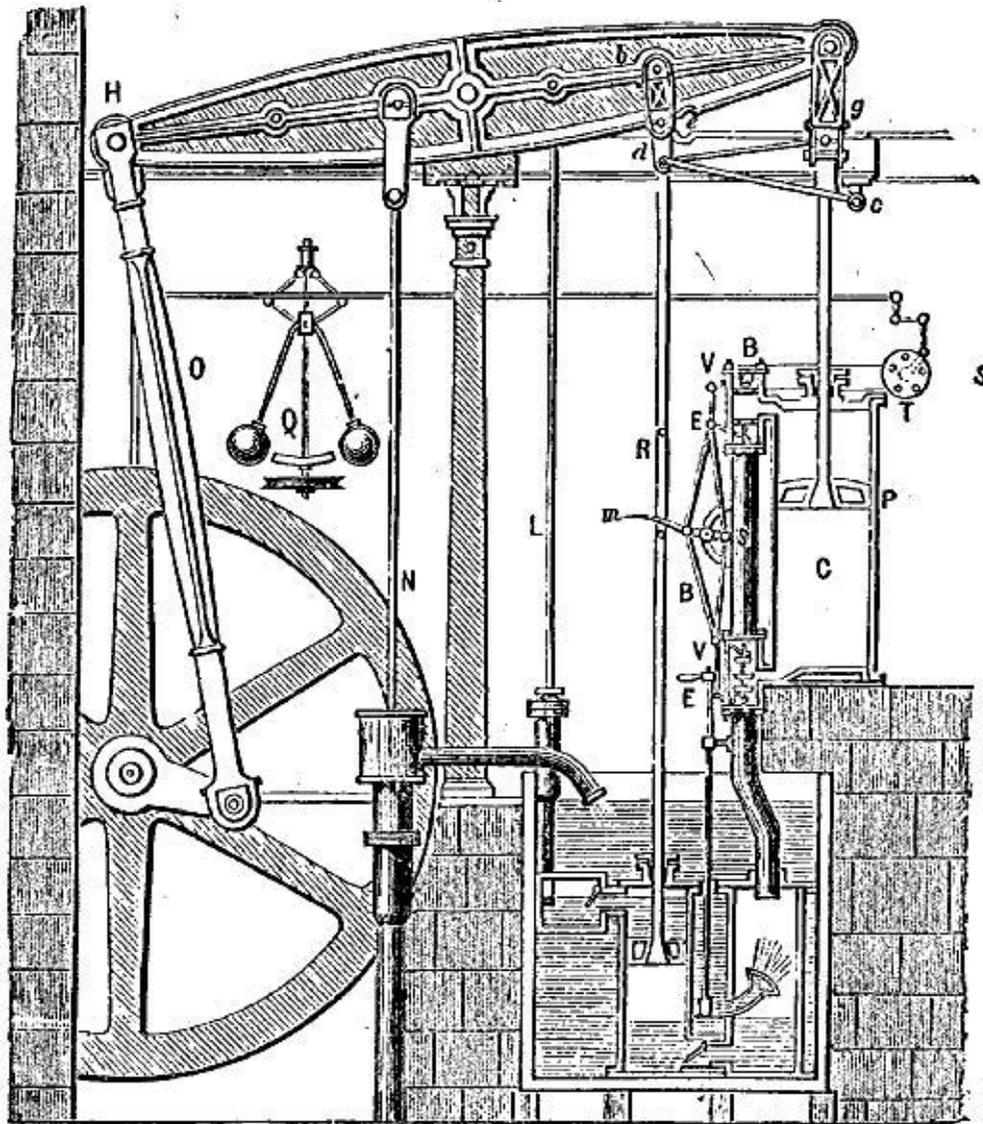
Boulton & Watt's Double-Acting Engine, 1784.
